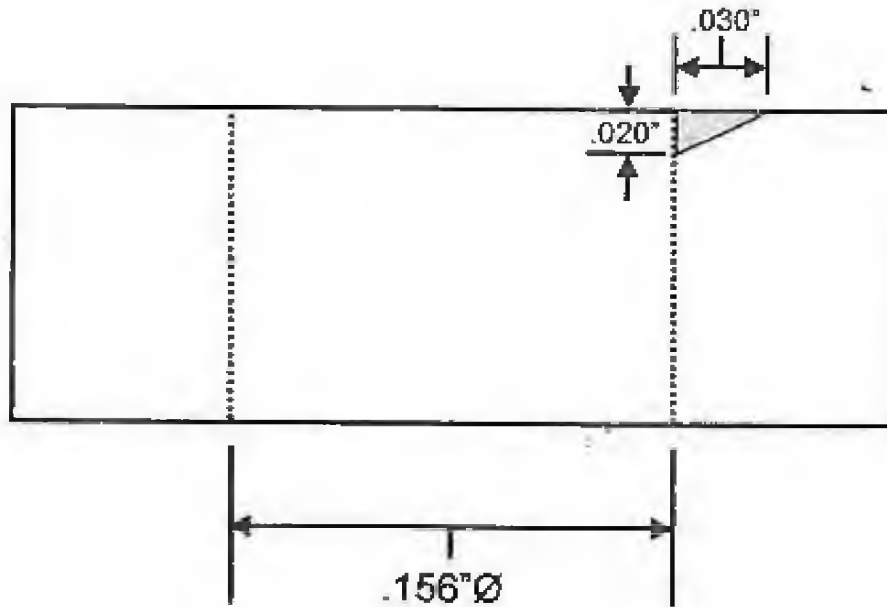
Cross-Sectional View of the EDM Notch in the Center Hole
